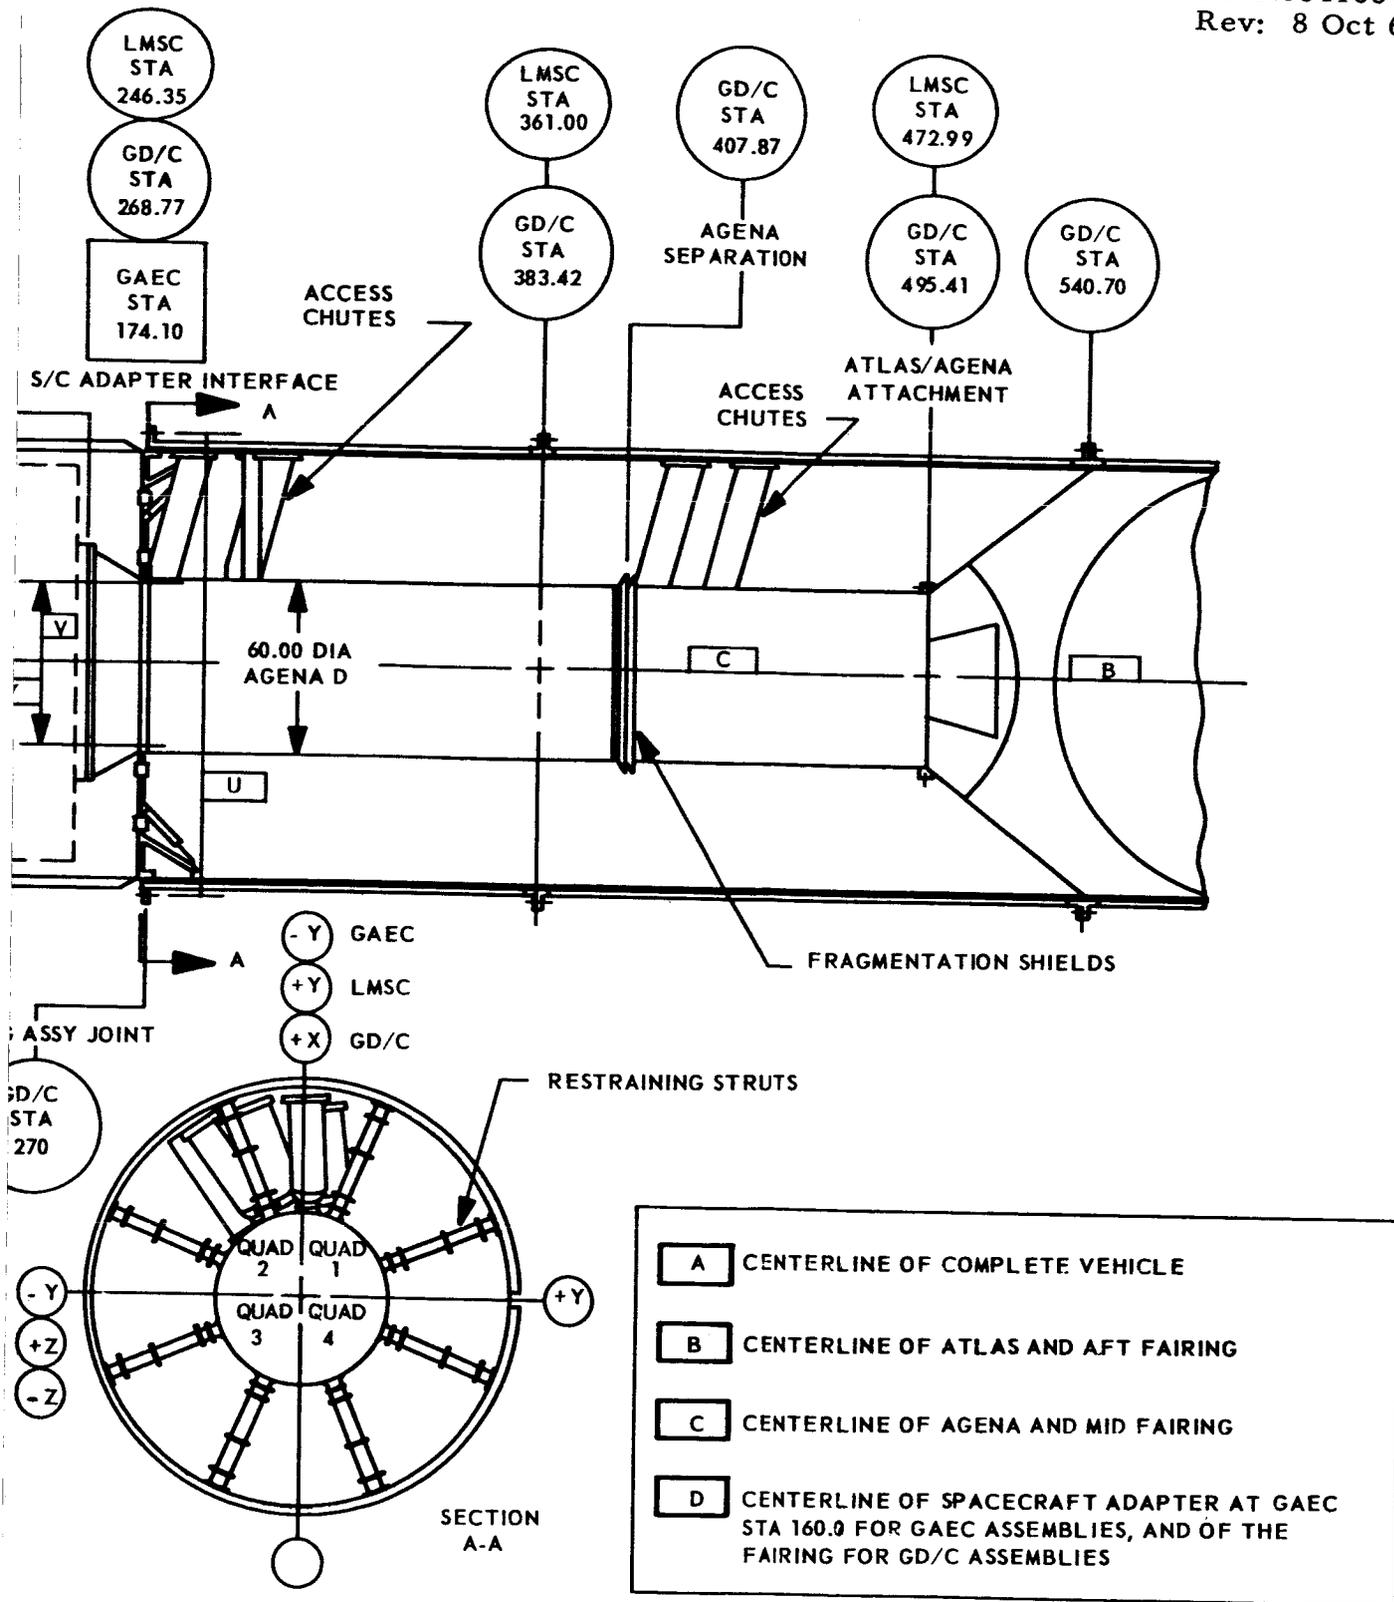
OAO Shroud System Overall Dimensions and Clearances
